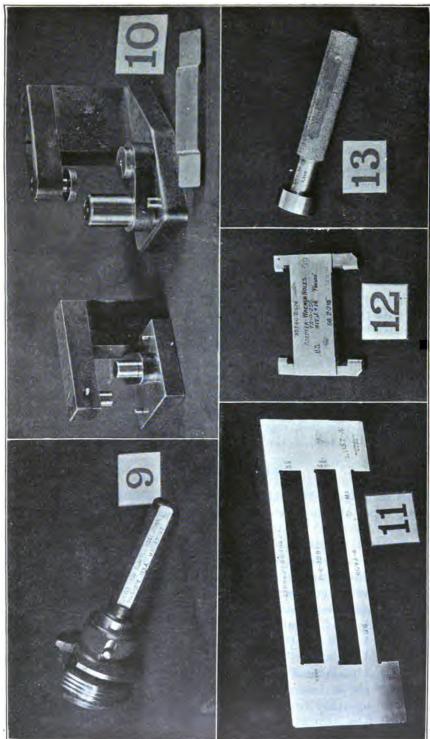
,—Typical gauges designed or approved by the Ordnance Office, gauge section 9. Thread gauge for adapter hole and shell top. 10. Flush pin gauge and check. 11. Diaphragus width and diameter gauge. 12. Snap gauge for adapter wrench hole. 13. Flug gauge for hole in TNT.
